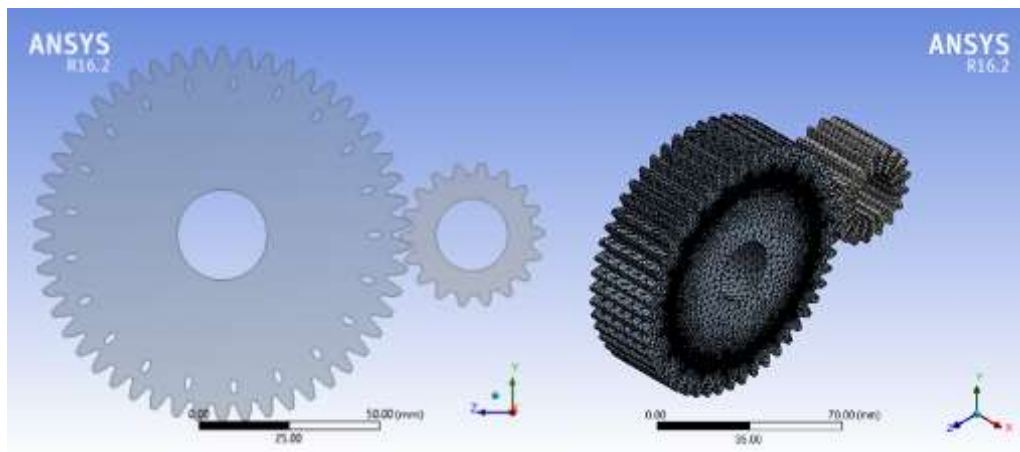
3D Model (left) and meshed view (right) of involute gear arrangement
